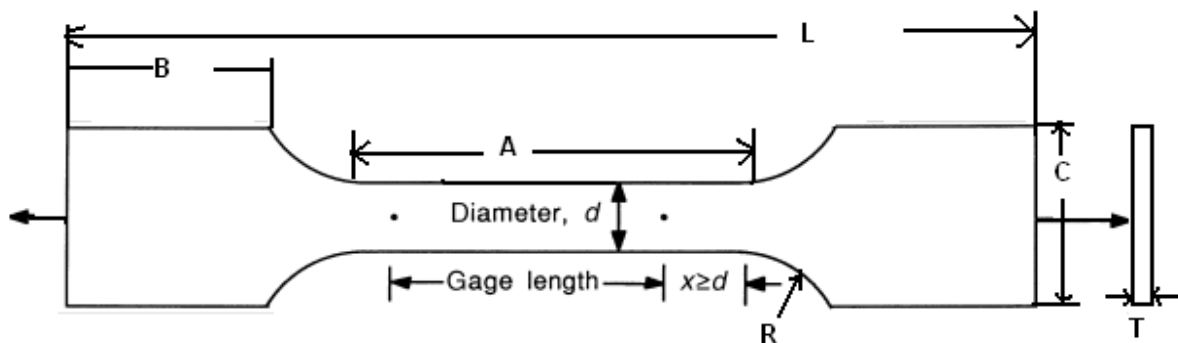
Schematic diagram of the tensile test specimen, showing a reduced gage section and enlarged shoulders.
